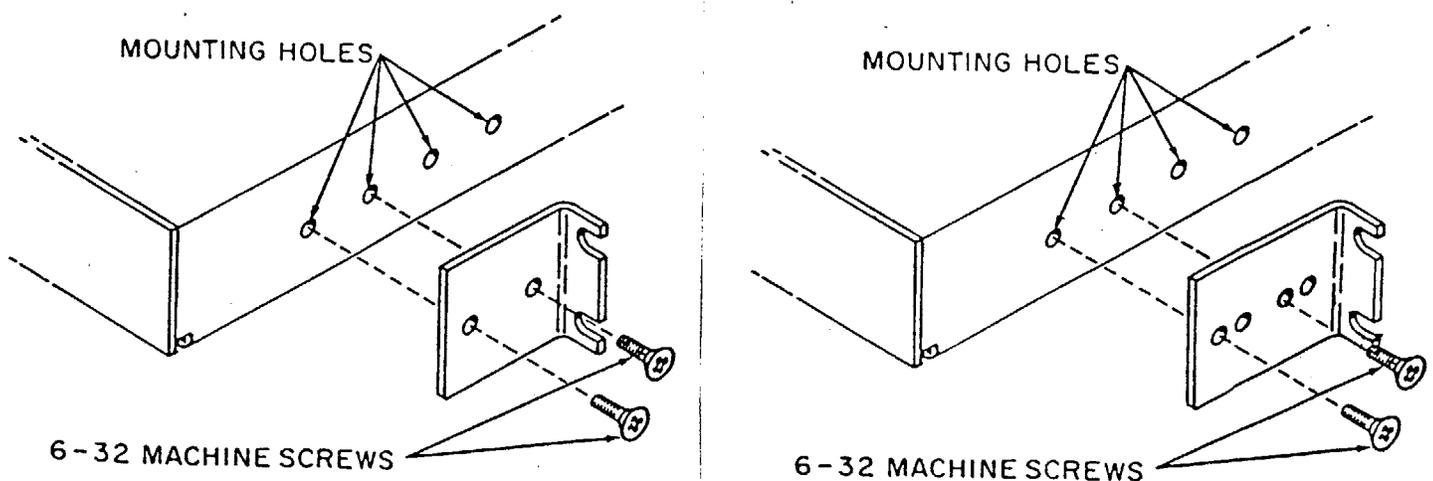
Attachment of standard and alternate mounting brackets to Digital Announcer
